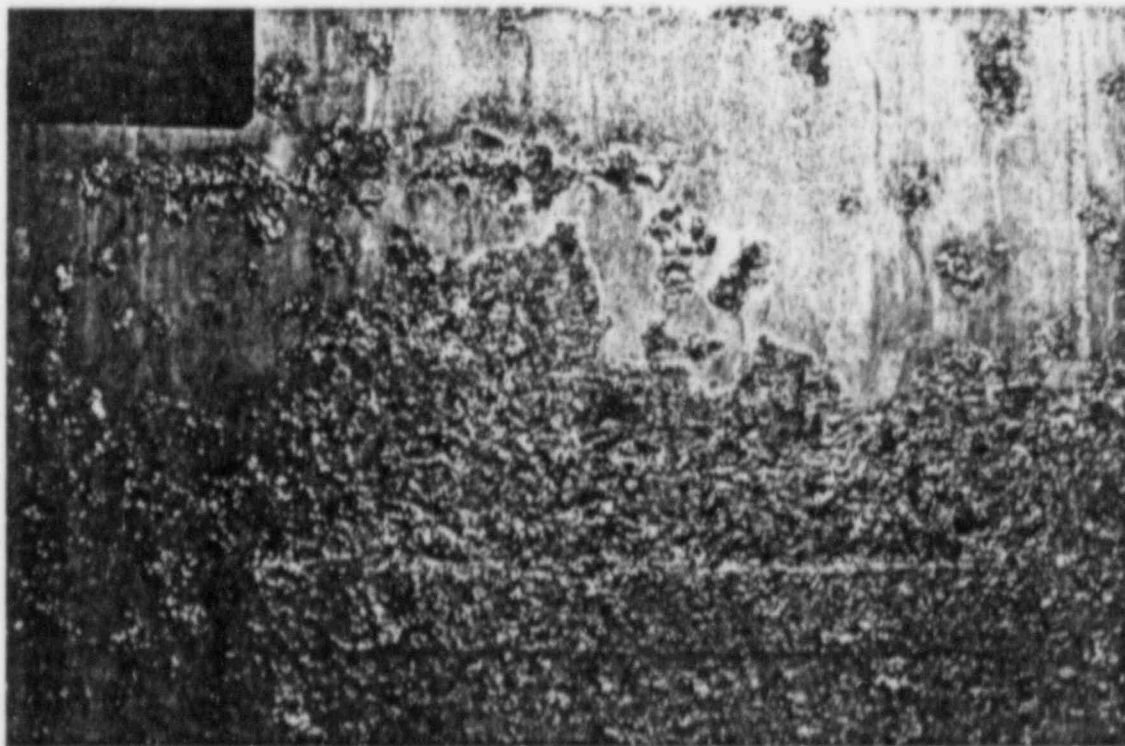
Tank 8D-1 Weldment Before Wire Brushing,
